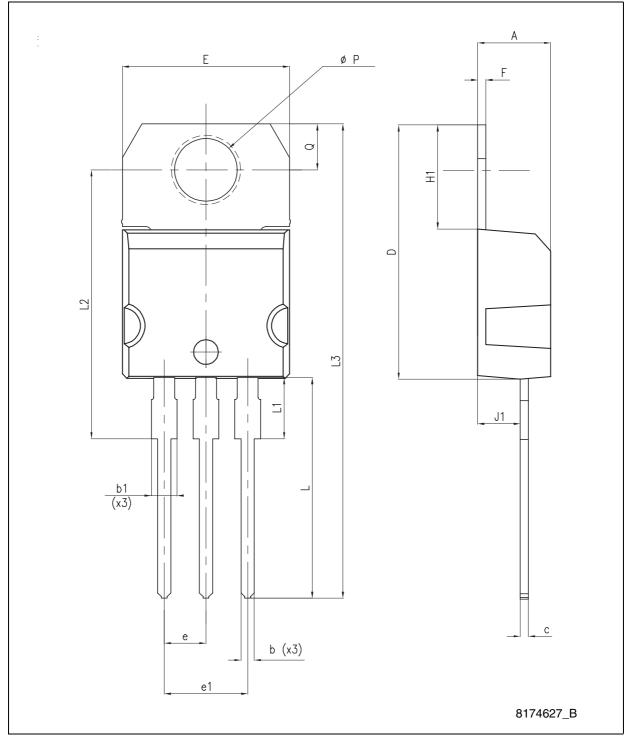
Drawing dimension TO-220 (type STD-ST Single Gauge)
